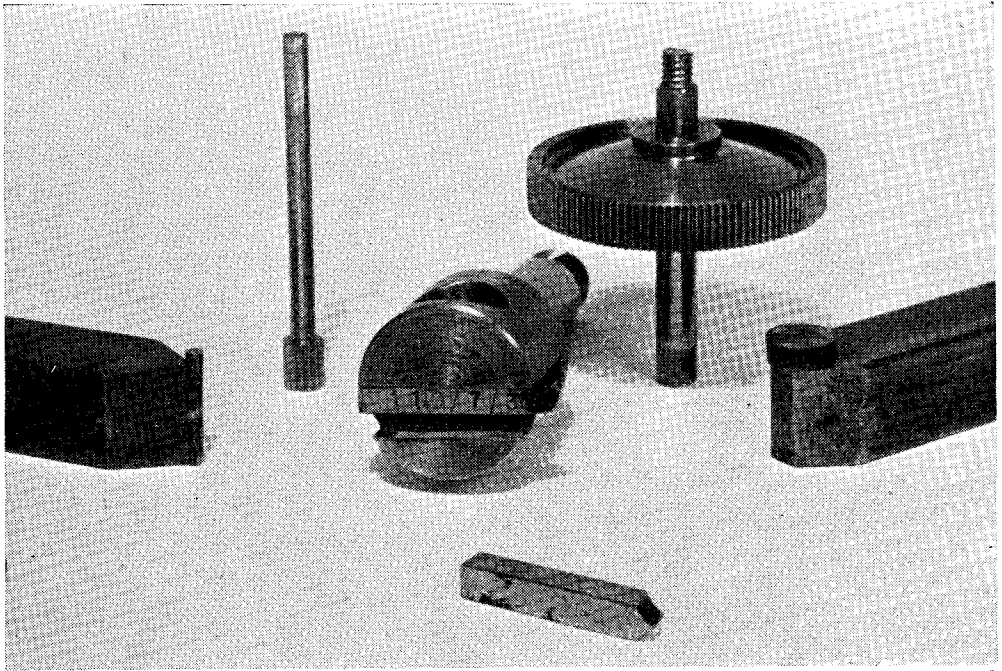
The flycutter and its work. These gears have run at over 80,000 r.p.m. Right and left: single and form tools
